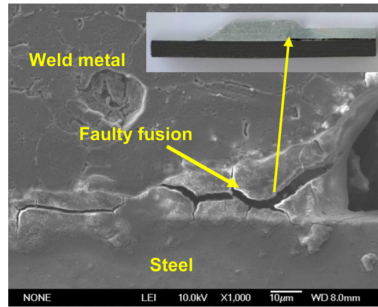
Fracture initiation at the weld root due to faulty fusion in a Cold Metal Transfer (CMT) lap joint produced of AA6061-T6 and galvanized boron steel. Copied from [38].
